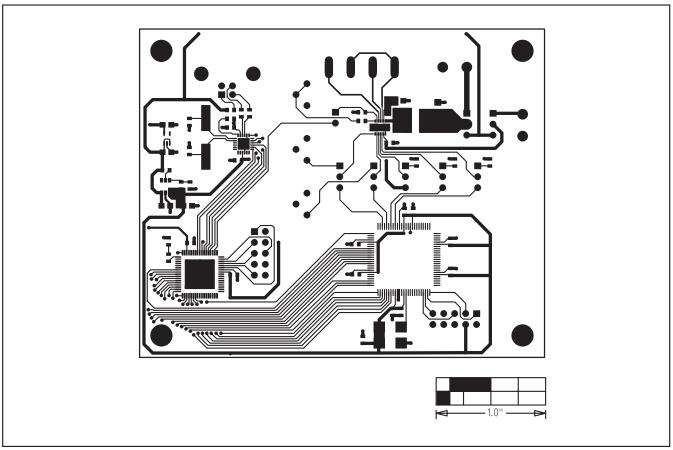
MAX14514 EV Kit PCB Layout—Component Side
